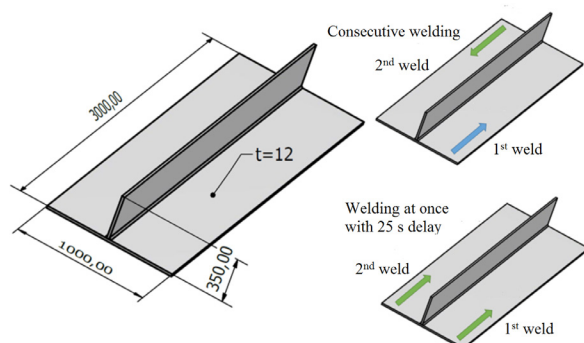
Dimensions of the sample and welding sequences during distortions measurements
